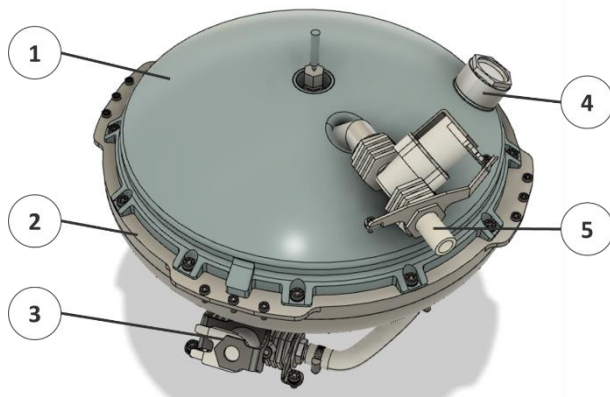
Whole pressure vessel with the tubing of the cooling system; (1) – Heat Sink; (2) – Lower side of the pressure vessel; (3) – cool side tubing and valve; (4) – Heat Sink PCM Inlet; (5) – hot side tubing and valve.
